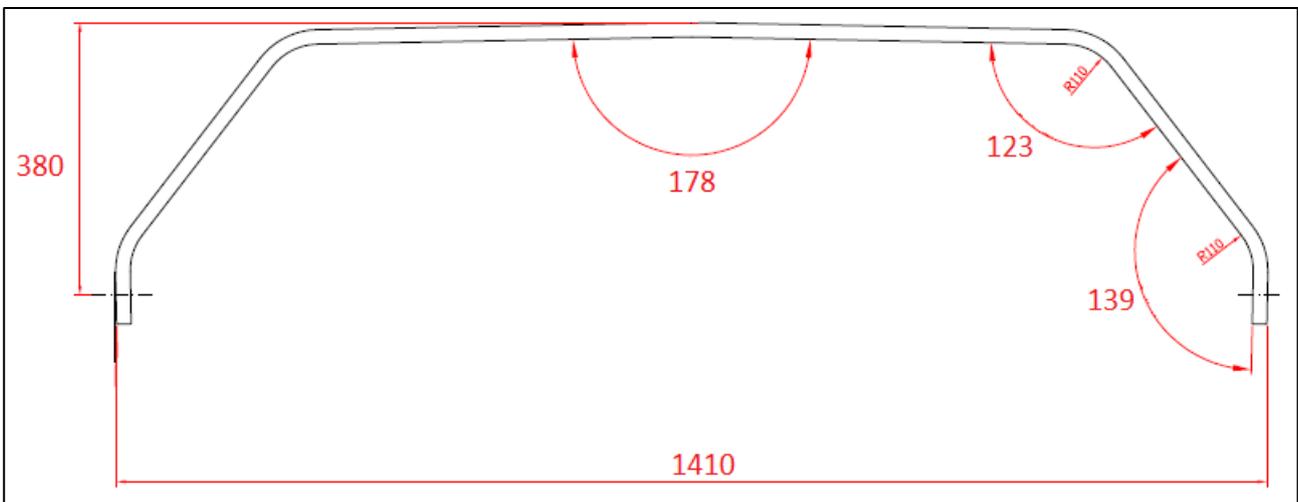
Main landing gear spring design nominal dimensions (unloaded)
